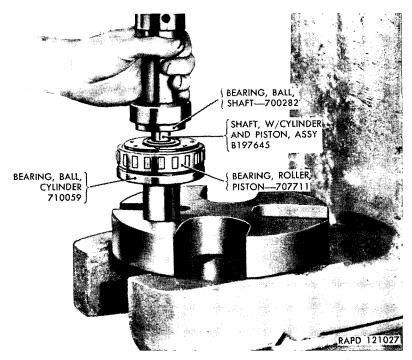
Pressing front ball bearing onto hydraulic motor shaft.
